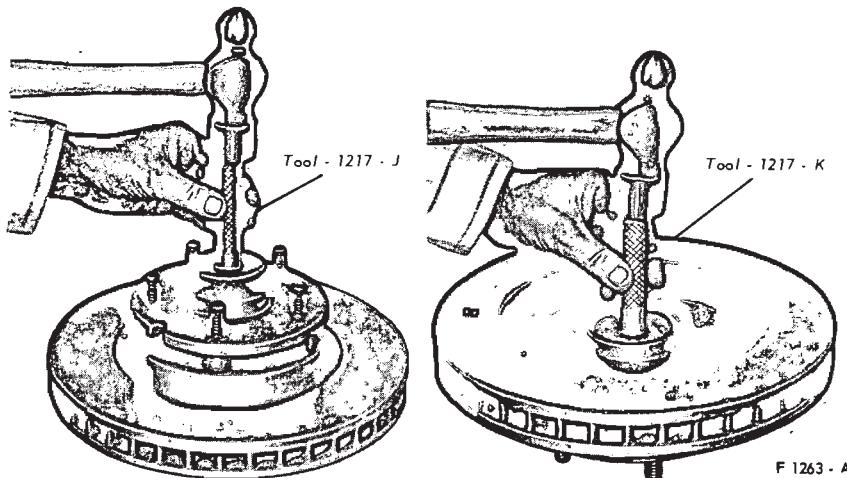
Installing Front Wheel Bearing Cup—Disc
